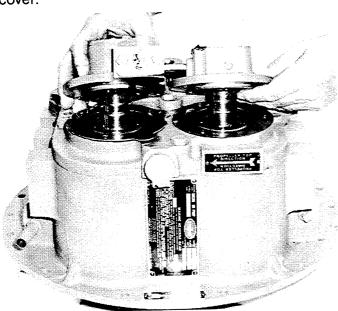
Removing or Installing Pump Mount and Valve Body Together.
